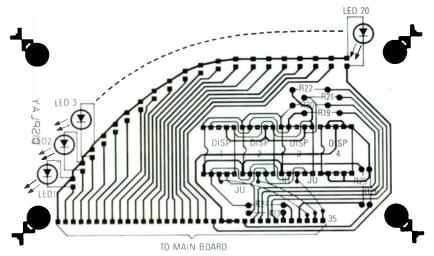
STUFF THE DISPLAY BOARD as shown here. The flat side of each LED should point toward the bottom of the board. The two boards are sandwiched together, and corresponding pads on the boards are connected with short pieces of stiff wire.
